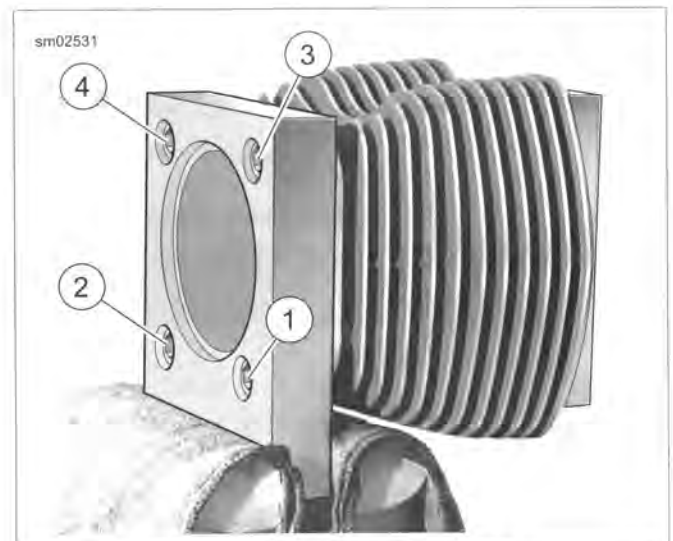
Cylinder Torque Plate Bolt Sequence
